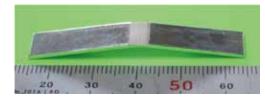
Example of bend workpiece (A1100, t = 1 mm).
